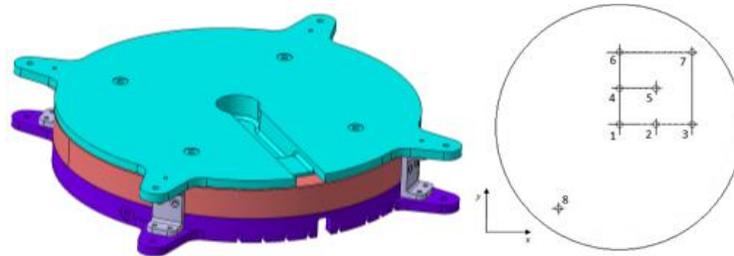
Example of instrumented RTM mould (left) and lower mould sensor setup schematic (right)
